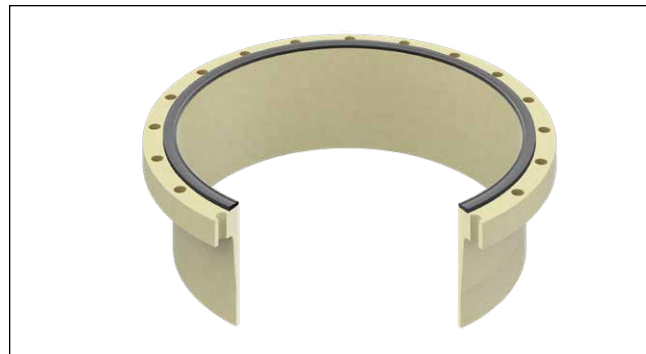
Profiled ring gasket (considered as raised face condition for torque setting)
